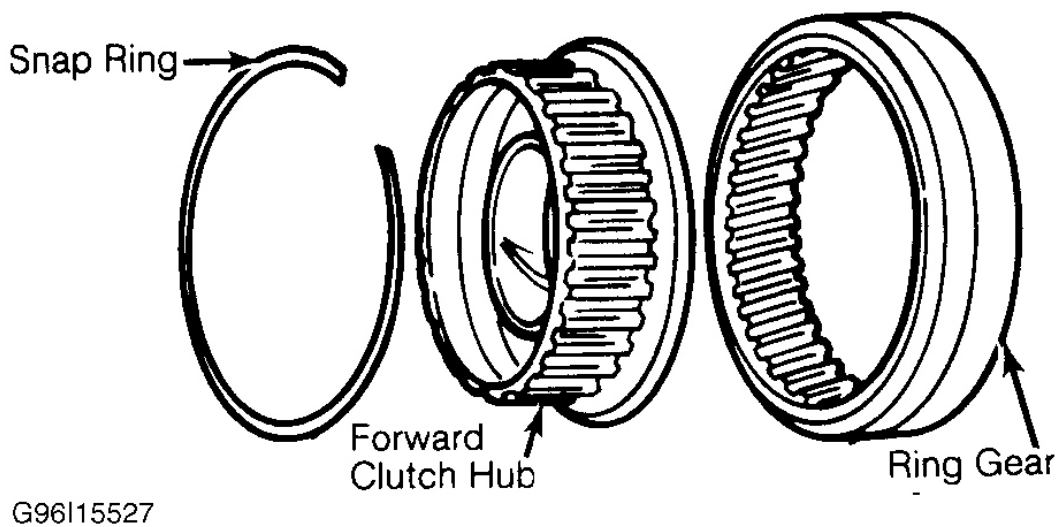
View Of Forward Clutch Hub And Ring Gear
